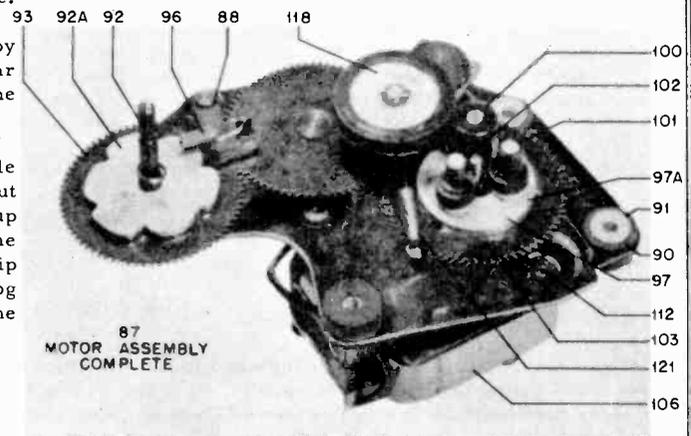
MOTOR & SPEED CHANGING ASSEMBLY
